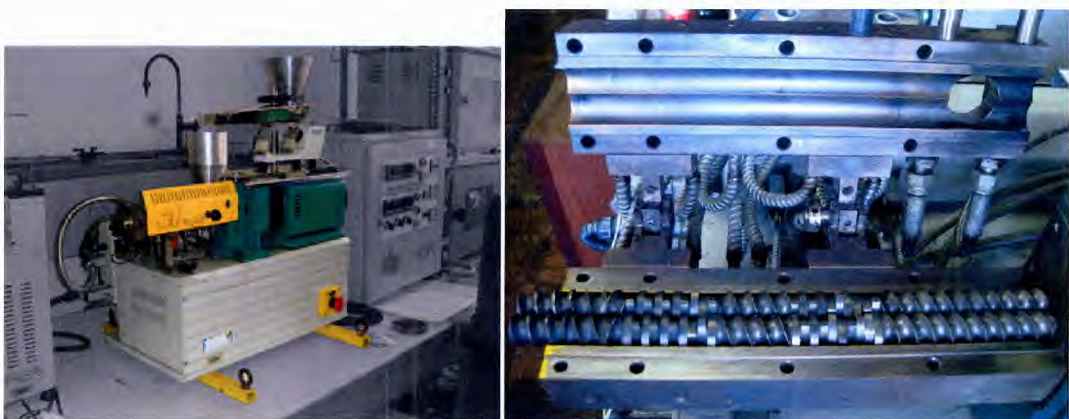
PRISM laboratory twin-screw co-rotating extruder. The screw length is 240 mm
